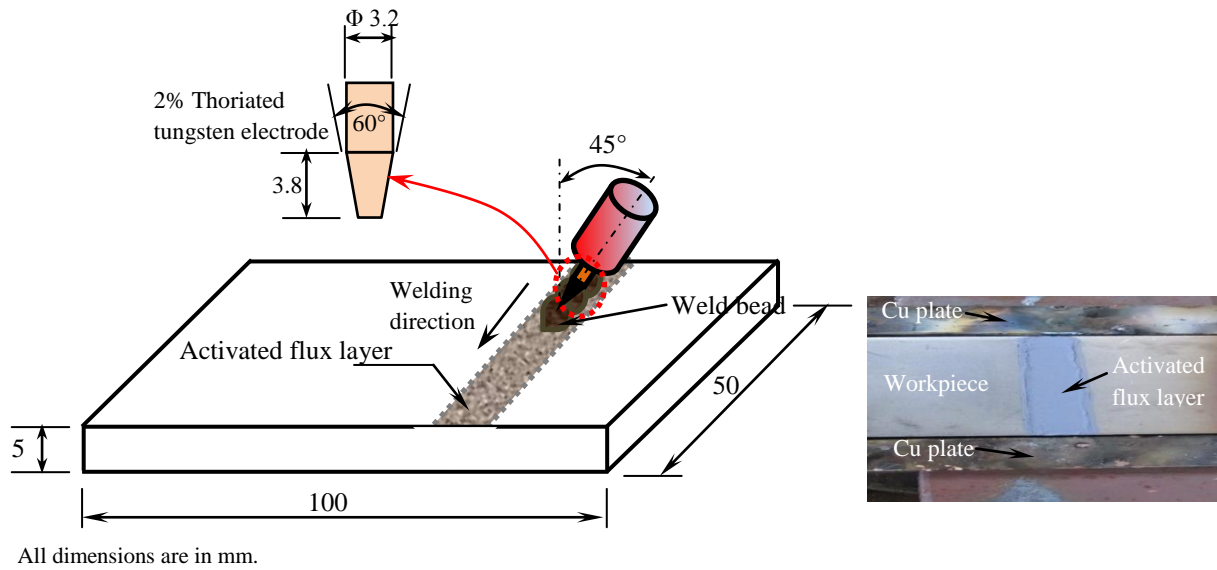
Schematic diagram to illustrate ATIG welding arrangement
